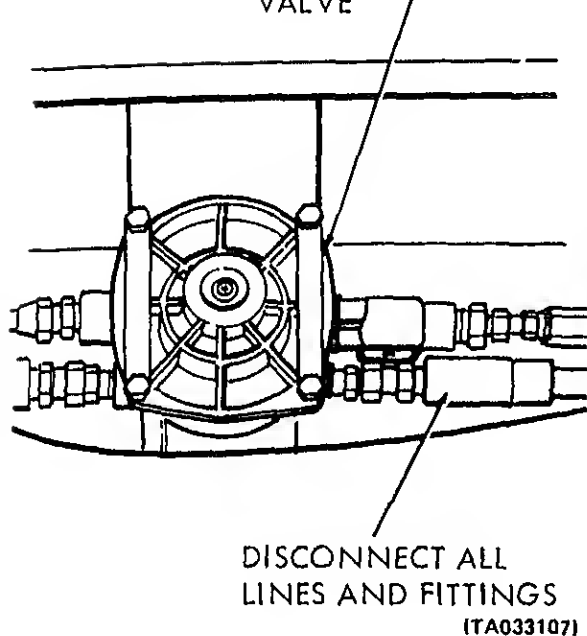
Relay valves, removal and installation (sheet 2 of 2).
